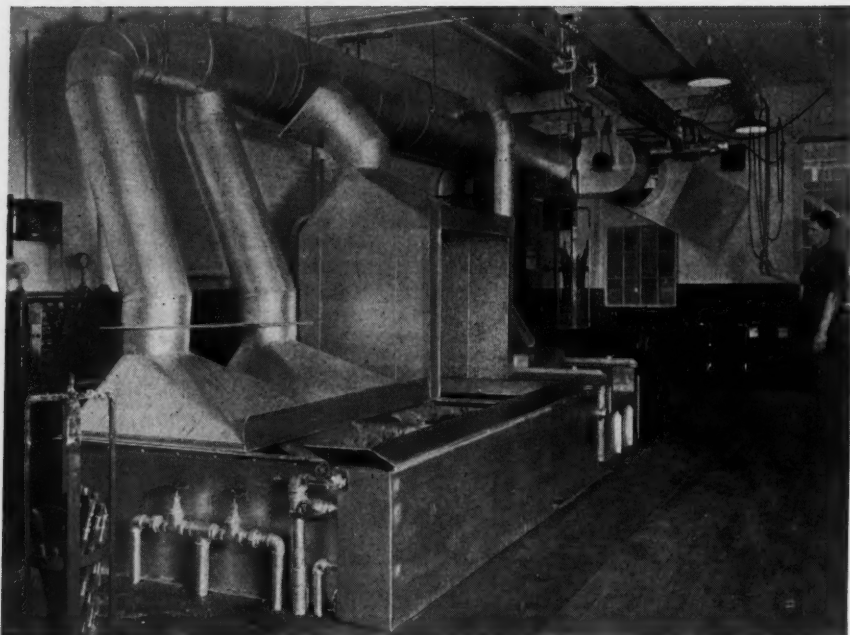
A modern casehardening department. At the left is a single-purpose fixture designed for handling shafts in the bath, and another fixture of the same type can be suspended from the monorail. (Photo courtesy Whitin Machine Works.)
